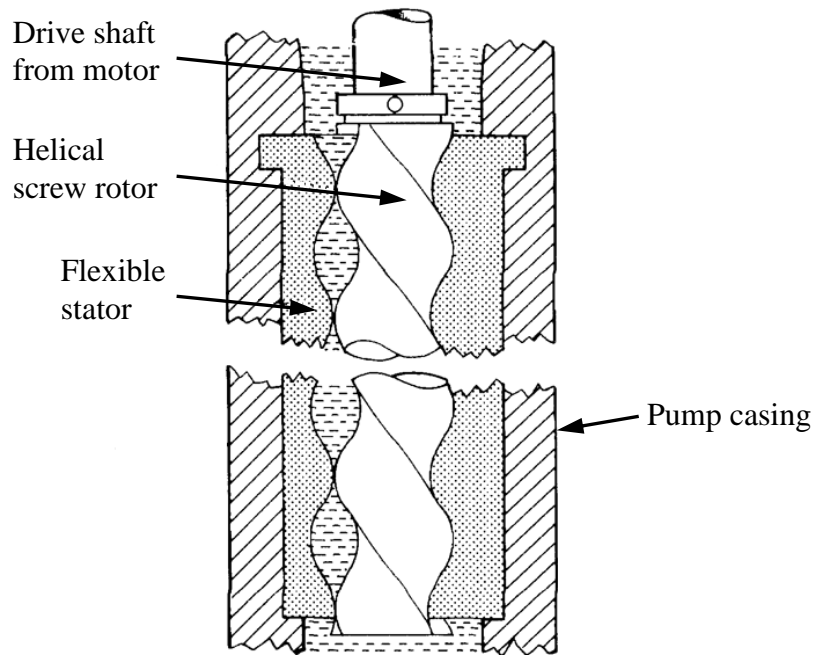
Cross-section schematic of a progressive cavity pump showing the helical screw rotor and flexible stator [82].
